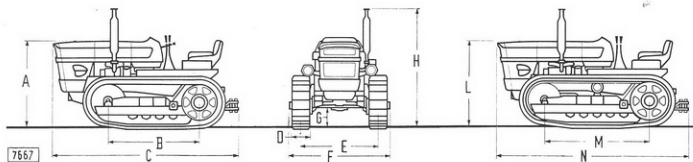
Overall Dimensions of Standard Tractors - mm. (in.).
